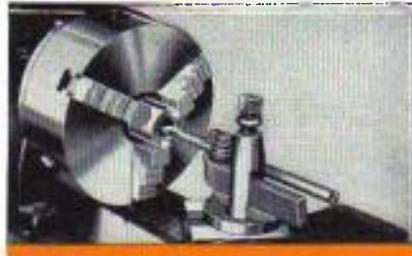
Boring the Hole in a Bushing after it has been Drilled.
